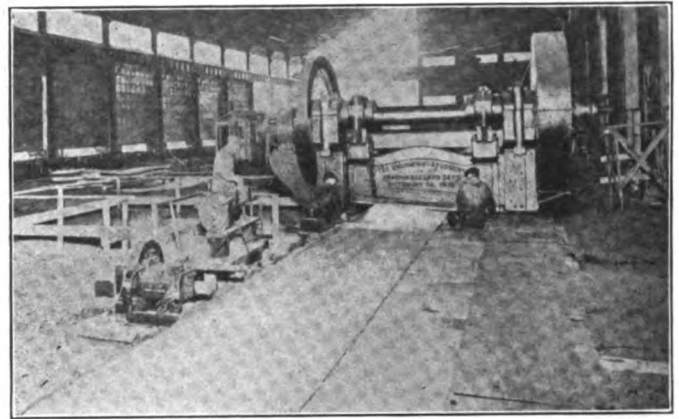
144" plate mill—Ashland Iron & Mining Company—The layout includes varied heating equipment, ample cooling space for medium plates, with space for additional beds if required for heavy work, a convenient laying out conveyor, good arrangement of shears with space for additional shearing equipment and liberal storage space.
